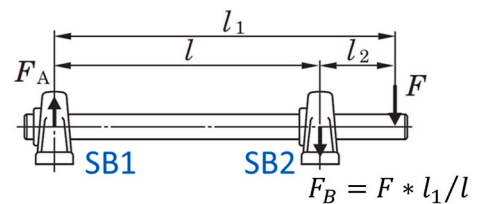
Schematic of the reaction forces on the support bearings SB1 and SB2 for the scenario where an external radial load acts on the bearing under test (adapted from KYH Mounted Bearing Units Catalogue, Nippon Pillow Block Co. Ltd., <https://www.fyhbearings.com>).
